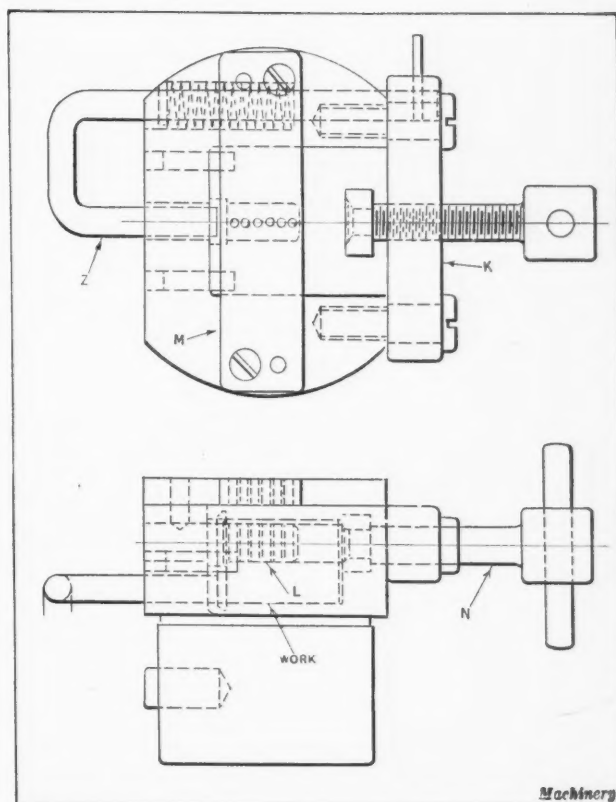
Work-holding Fixture employed in drilling the Pin Holes in the Lock Cylinder
